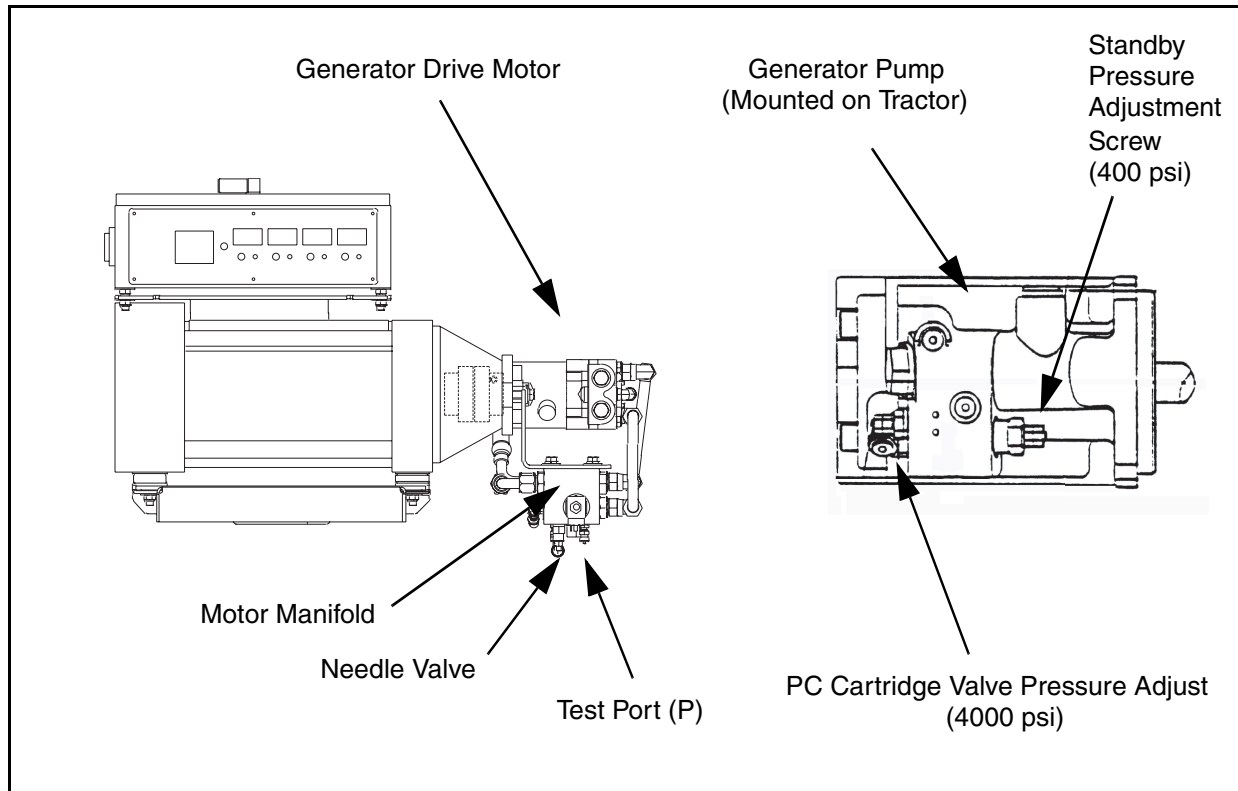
3 Screed Generator Hydraulic Pump Assembly
